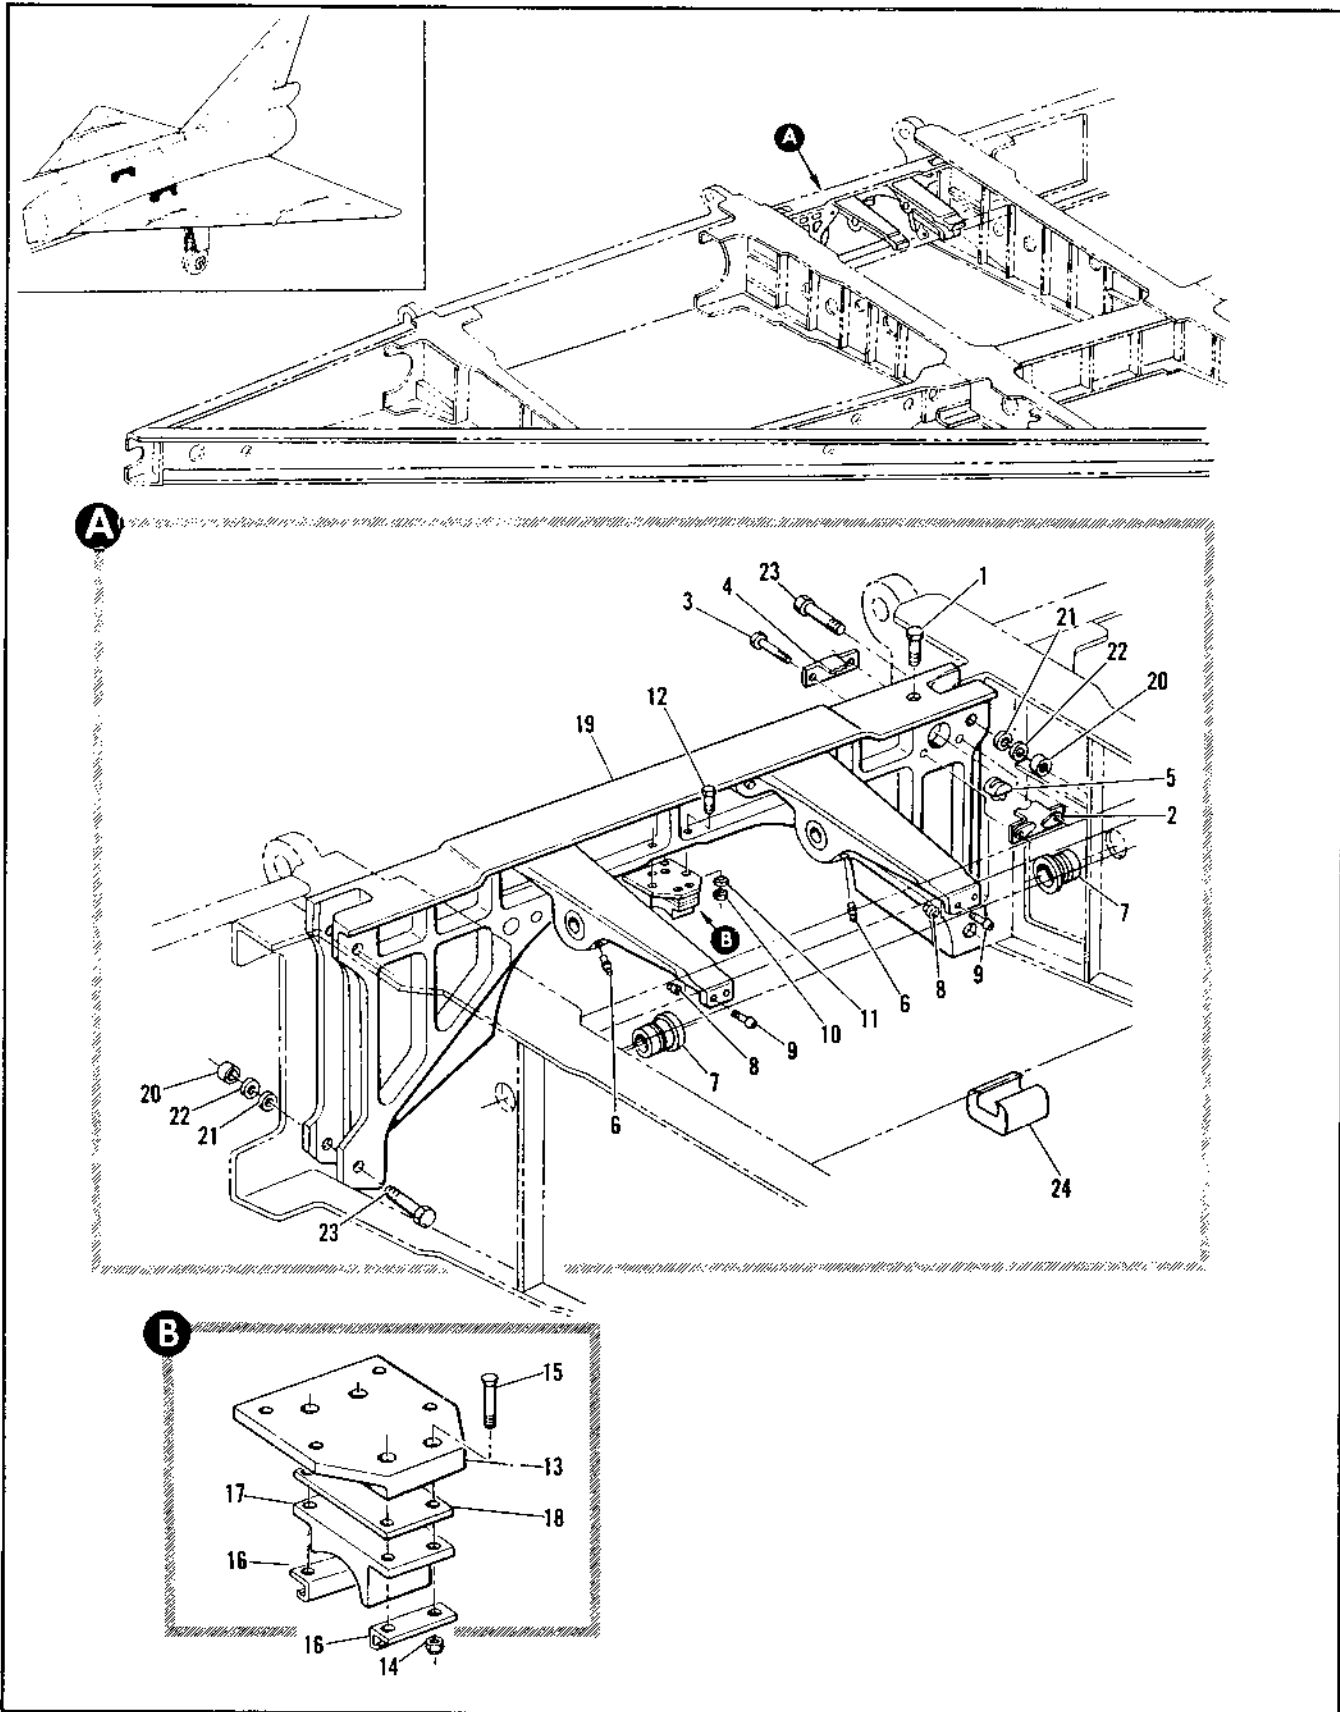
Main Landing Gear Fitting Installation BL 38
